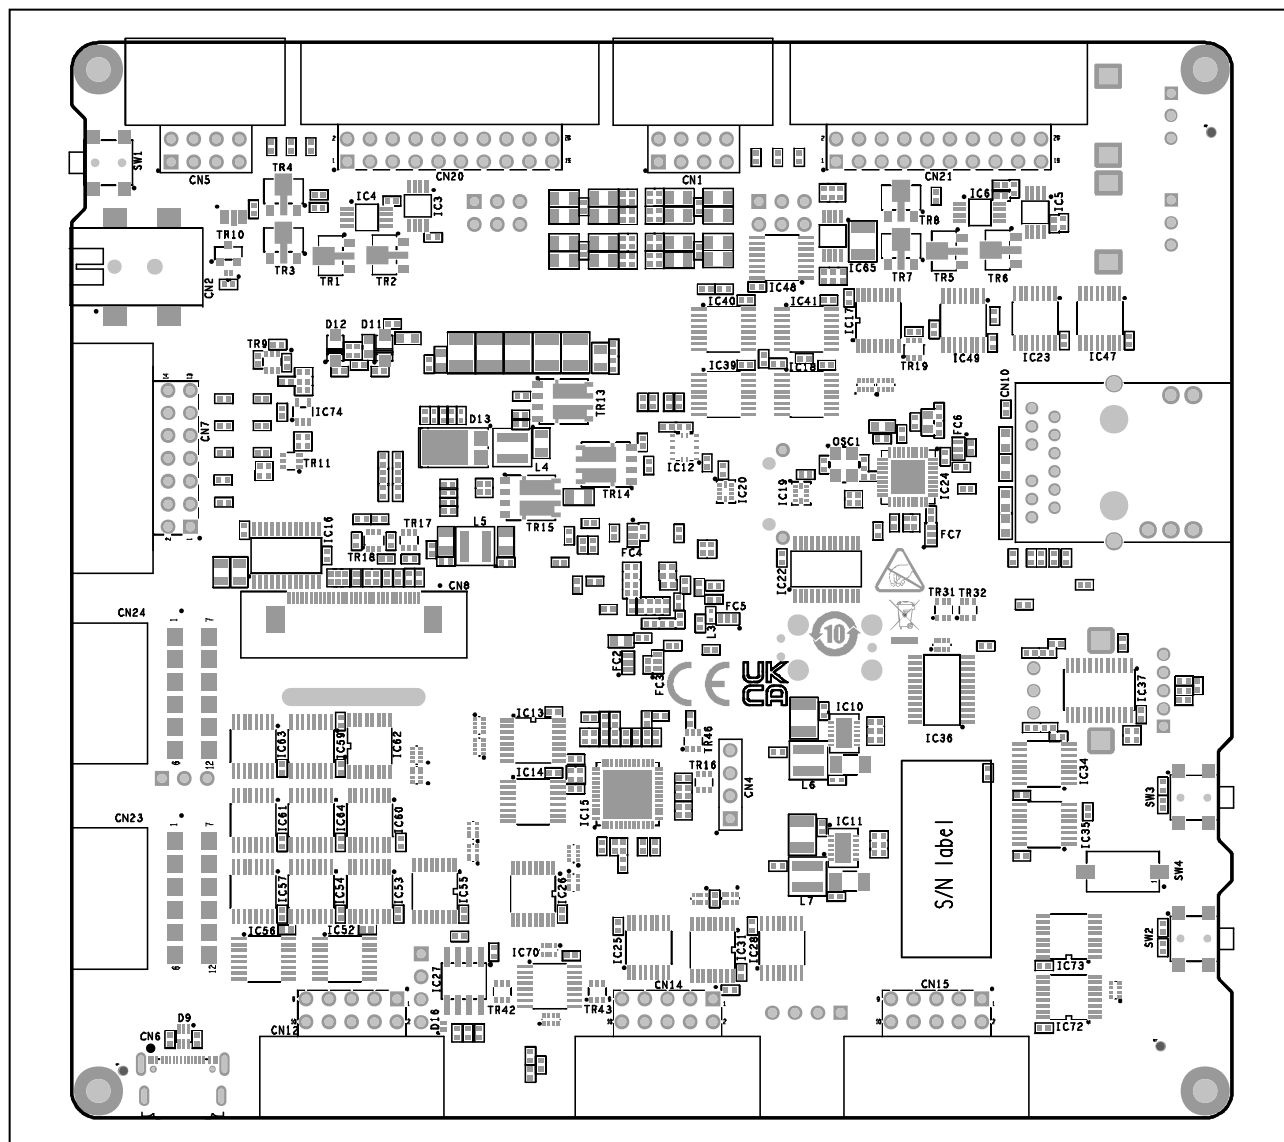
Starter kit board bottom view for board version D019567_06_V0300
